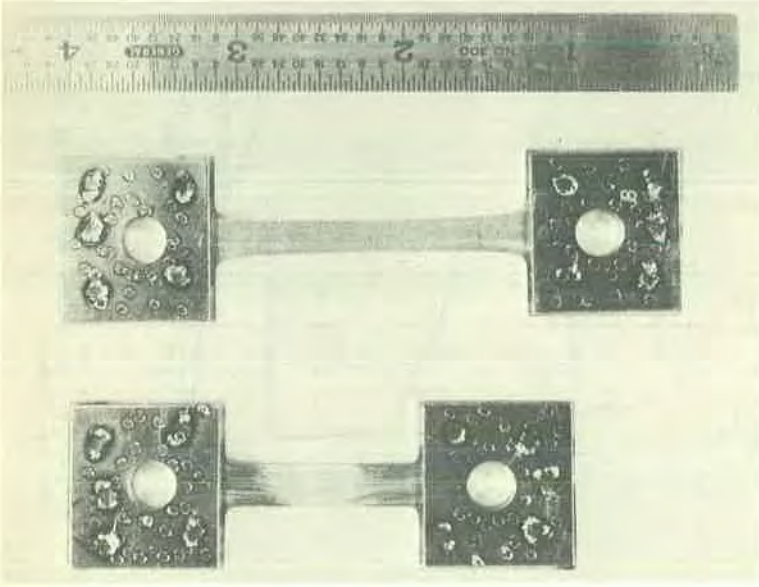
Annealed Type 316 Stainless Steel Tensile Specimens Before and After Testing
